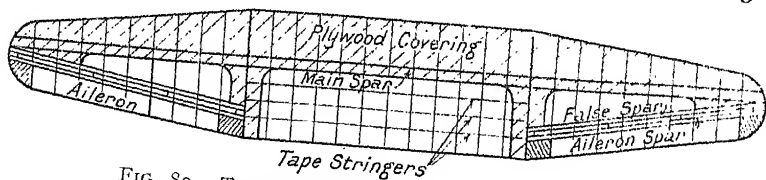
Typical Lay-out for Sailplane Main Plane.
